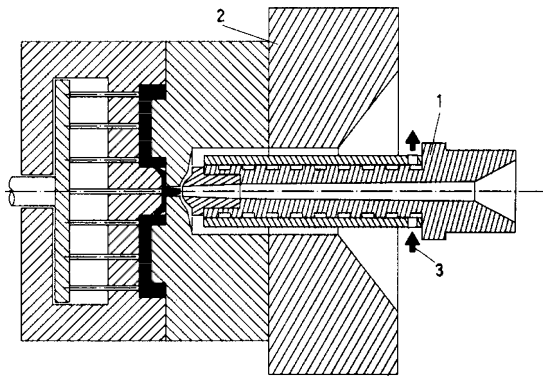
Thermoset injection mold with cold runner sprue bush belonging to 1: the machine injection unit that immerses into the nozzle side of 2: the cavity plate and fits non-positively during injection, 3: cooling circuit intake/outlet
